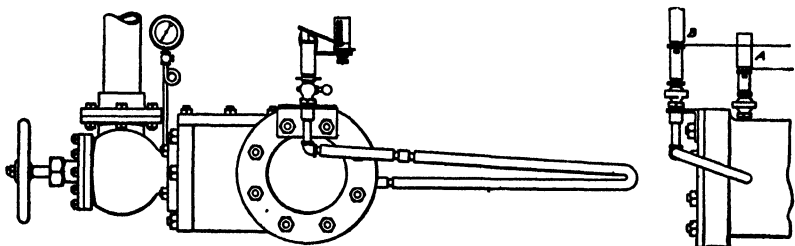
Method of Attaching Indicator Piping to Engine Cylinder
